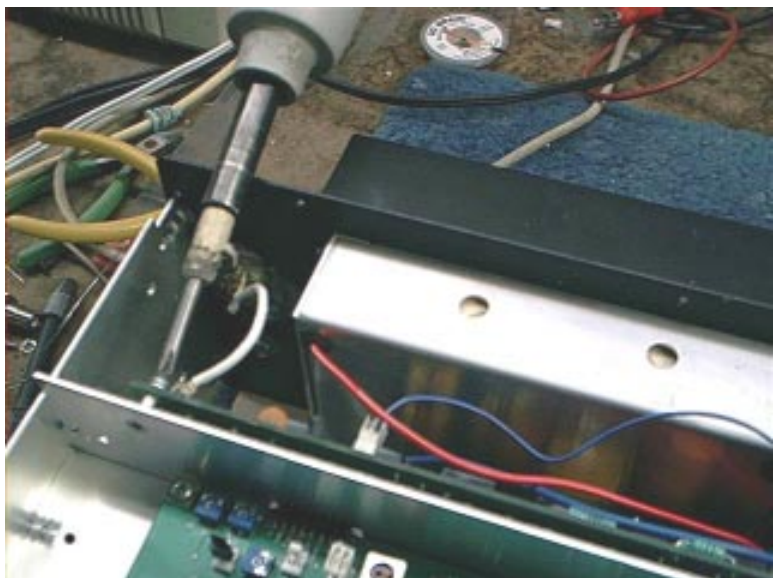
Remove screws holding the Low-Pass filter to the bulkhead.
